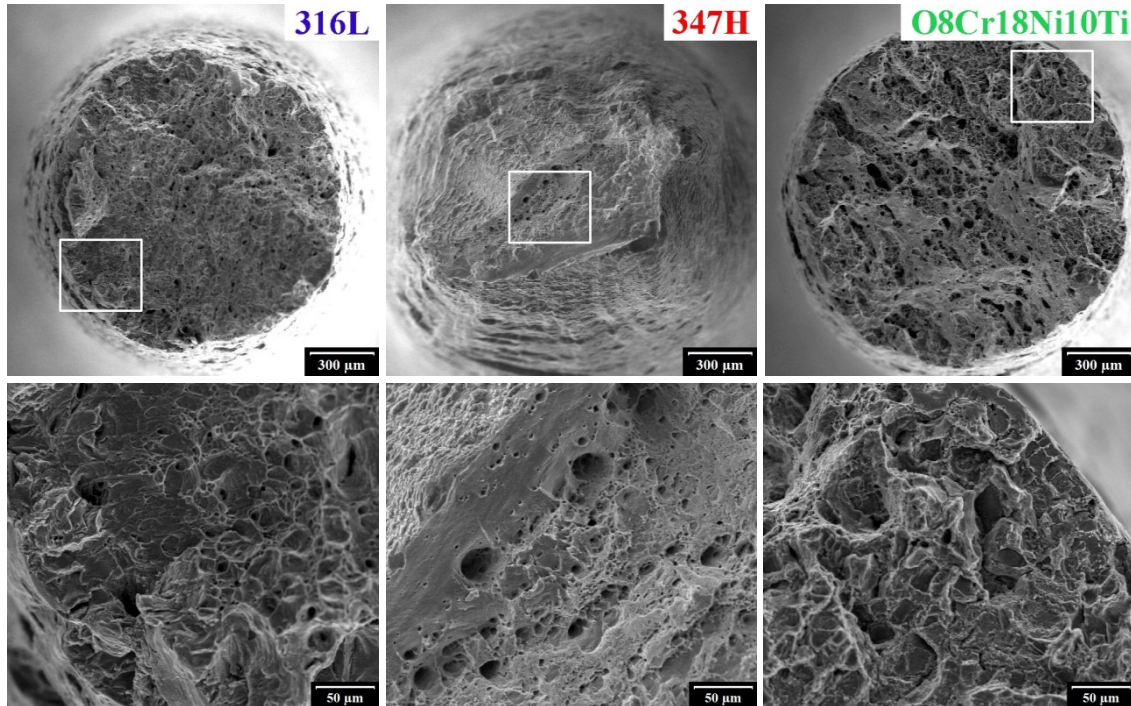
Fracture surfaces of a) 316L b) 347H and c) 08Cr18Ni10Ti specimens after the SSRT tests in 550°C 25 MPa SCW with 2000 ppb dissolved oxygen.
